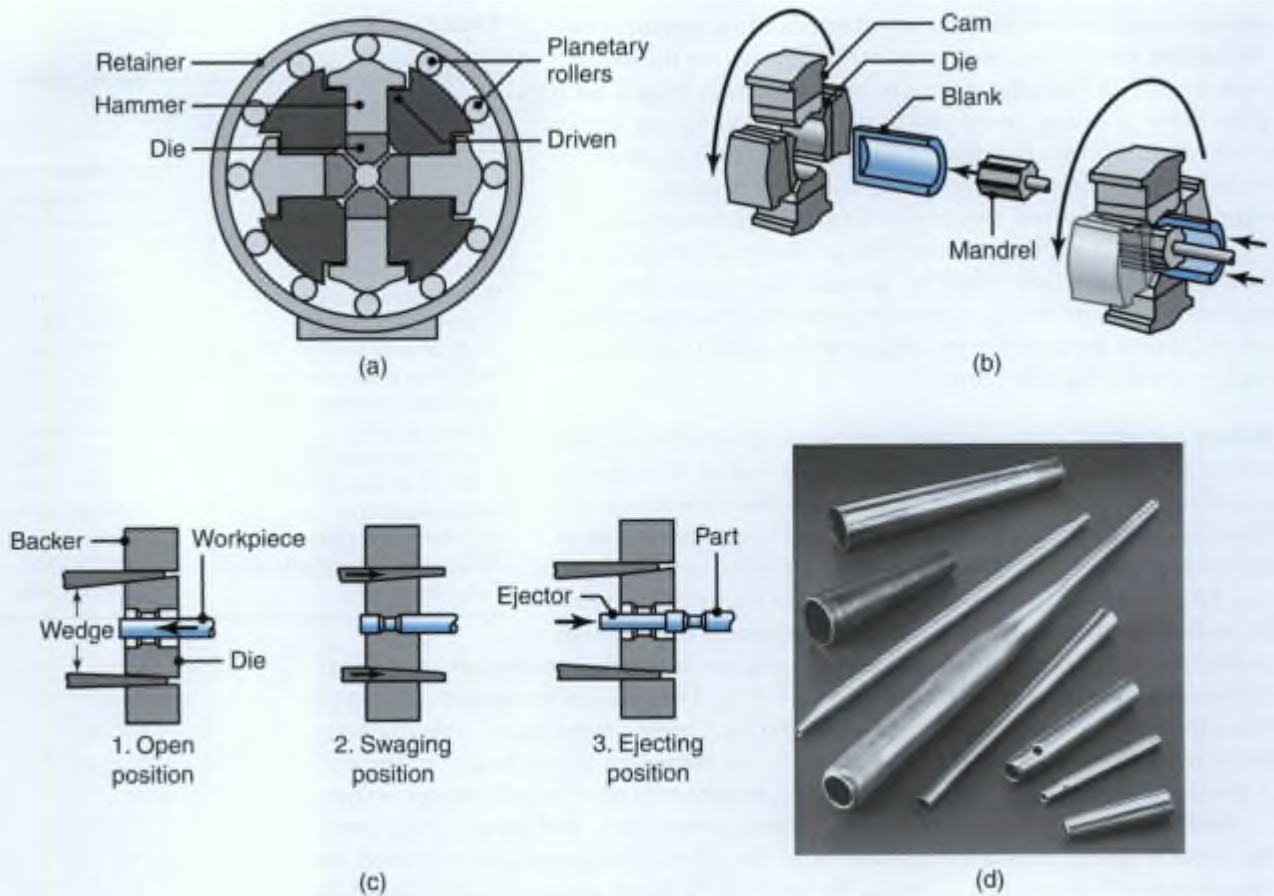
(a) Schematic illustration of the rotary-swaging process. (b) Forming internal profiles on a tubular workpiece by swaging. (c) A die-closing swaging machine, showing forming of a stepped shaft. (d) Typical parts made by swaging. *Source:* (d) Courtesy of J. Richard Industries.
